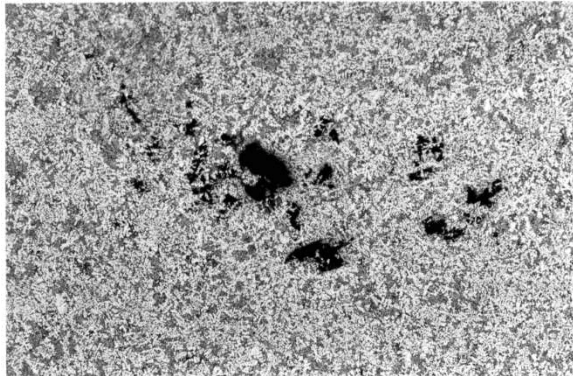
Porosities defect in die casting parts^[7.2-1]
